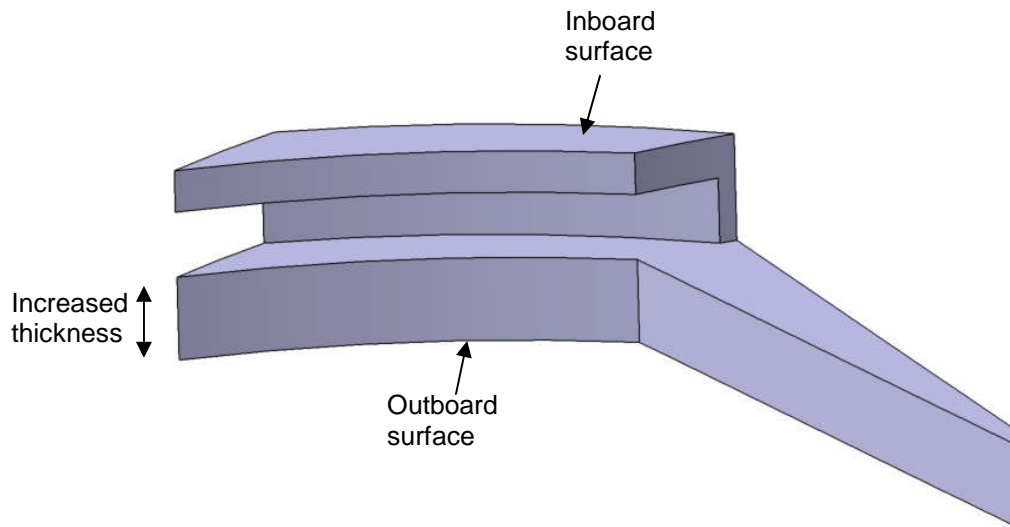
Datum rotor with thicker outboard surface
